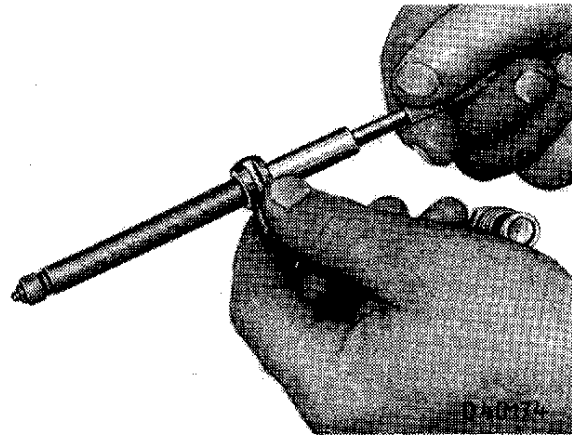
Removal of Nozzle Needle Using Special Tool No. 16481
